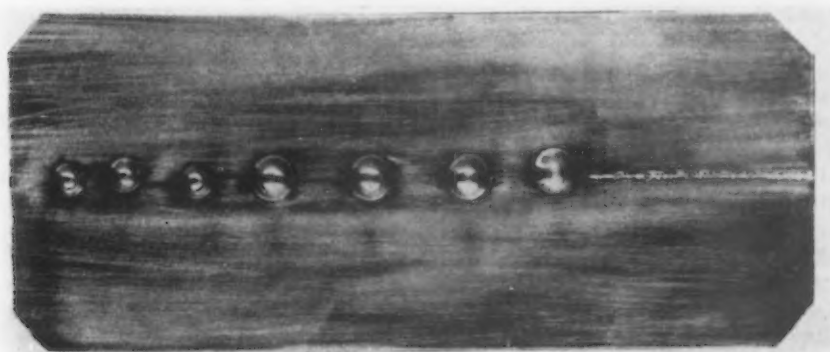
Sample of welded sheet as it appears after testing.
